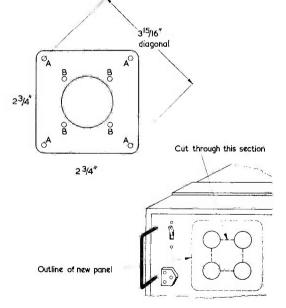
Fitting a tuning meter panel. Holes "A" are countersunk and match the existing speaker holes. Holes "B" are for the meter mounting screws and should be appropriately positioned. The large hole in the panel takes the meter body
